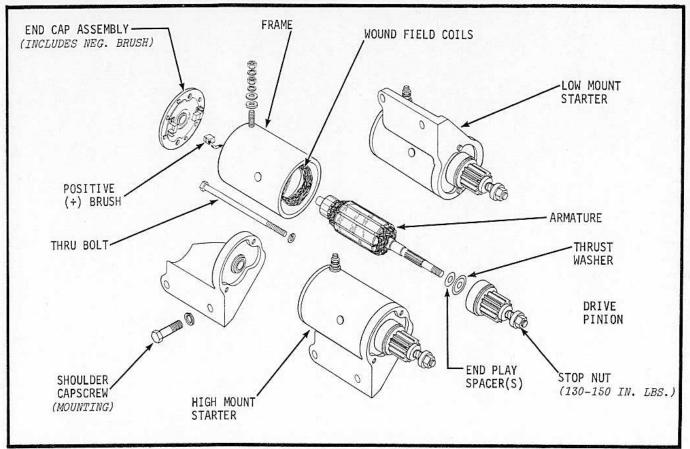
WOUND FIELD TYPE STARTING MOTOR--EXPLODED VIEW
